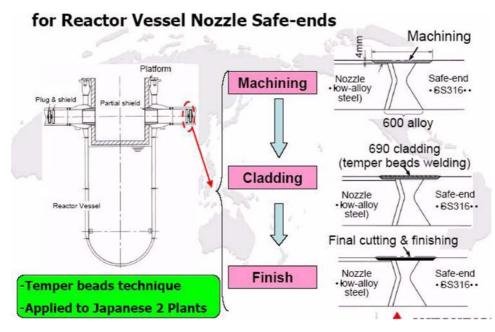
3-layer temper bead weld cladding technology.
